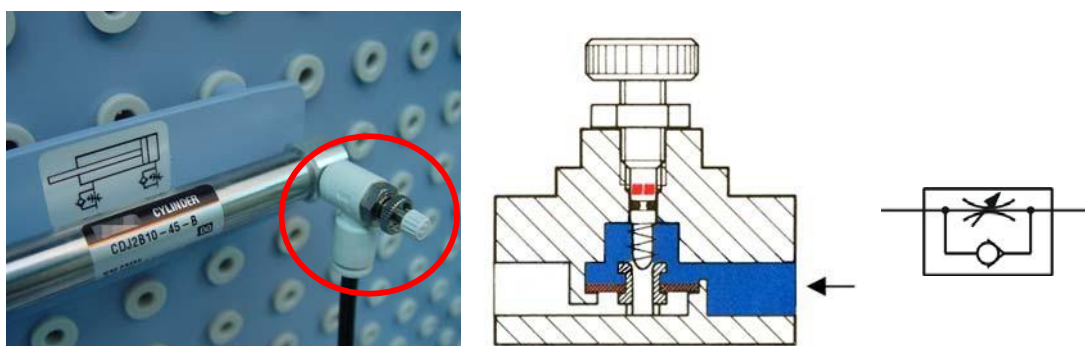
flow control valve with its cross-section drawing and pneumatic symbol [14].
